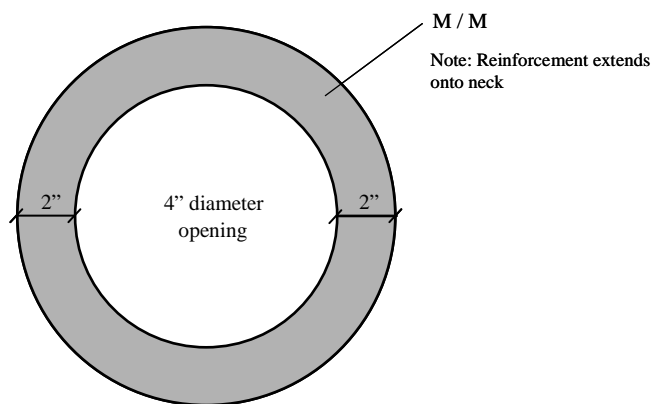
Interior reinforcement of original manway – Layer 1
